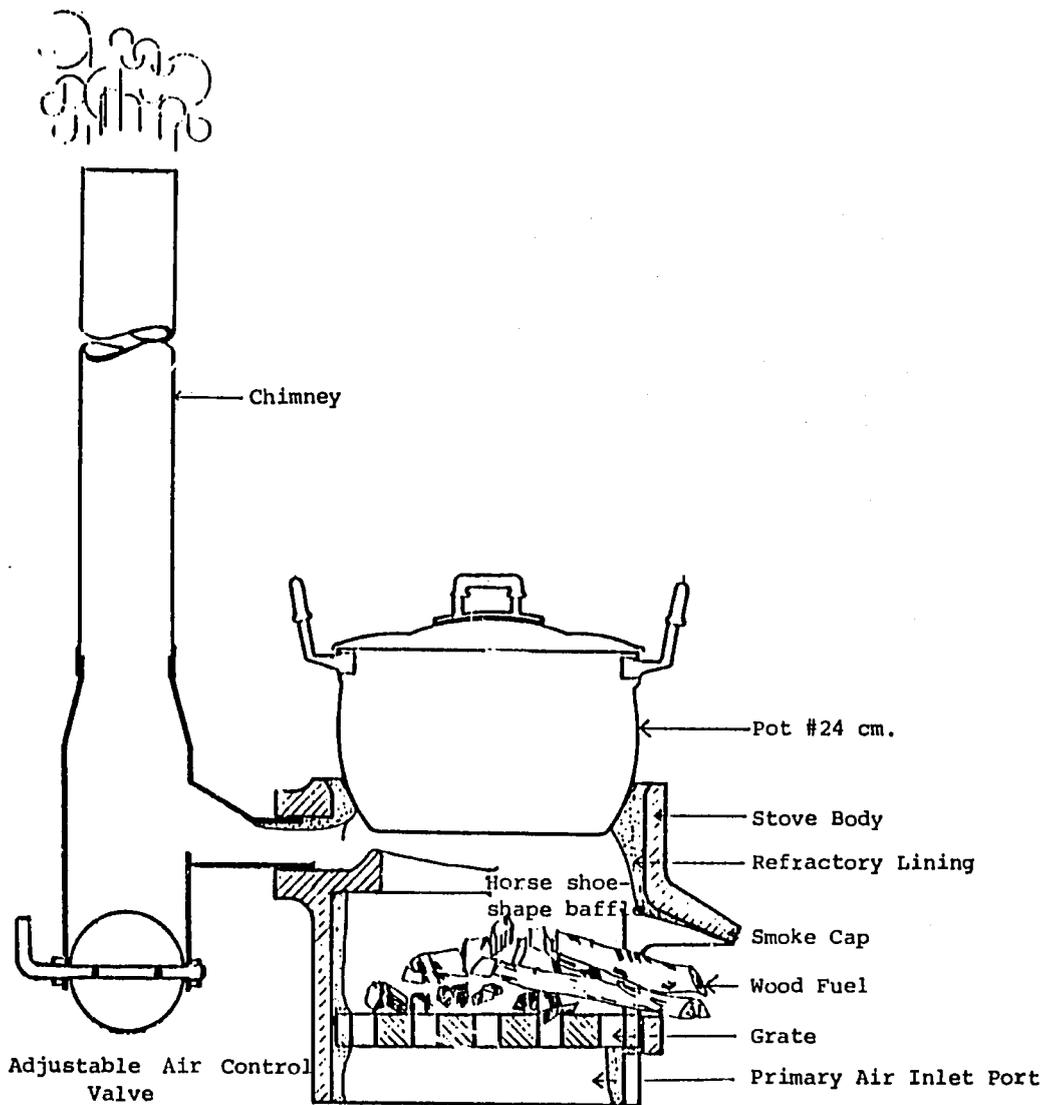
Drawing of developed chimneyed wood stove prototype showing the construction and terminology.
